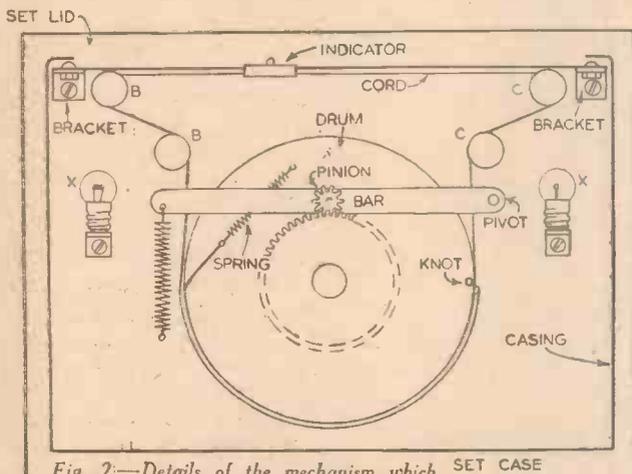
Details of the mechanism which is mounted on the side of the receiver casing.
